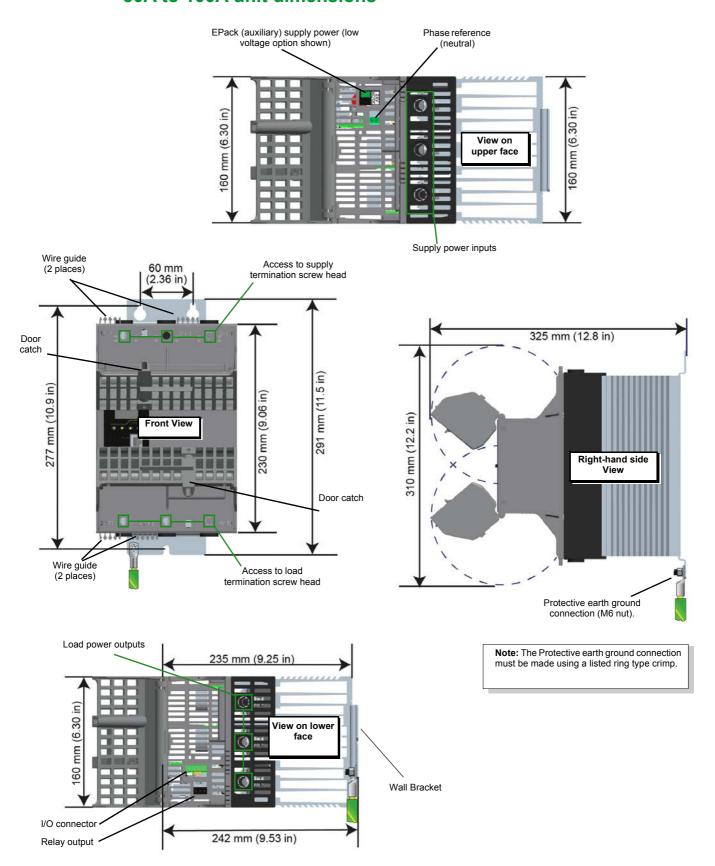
Mechanical installation details (80A to 100A units) (doors open).
